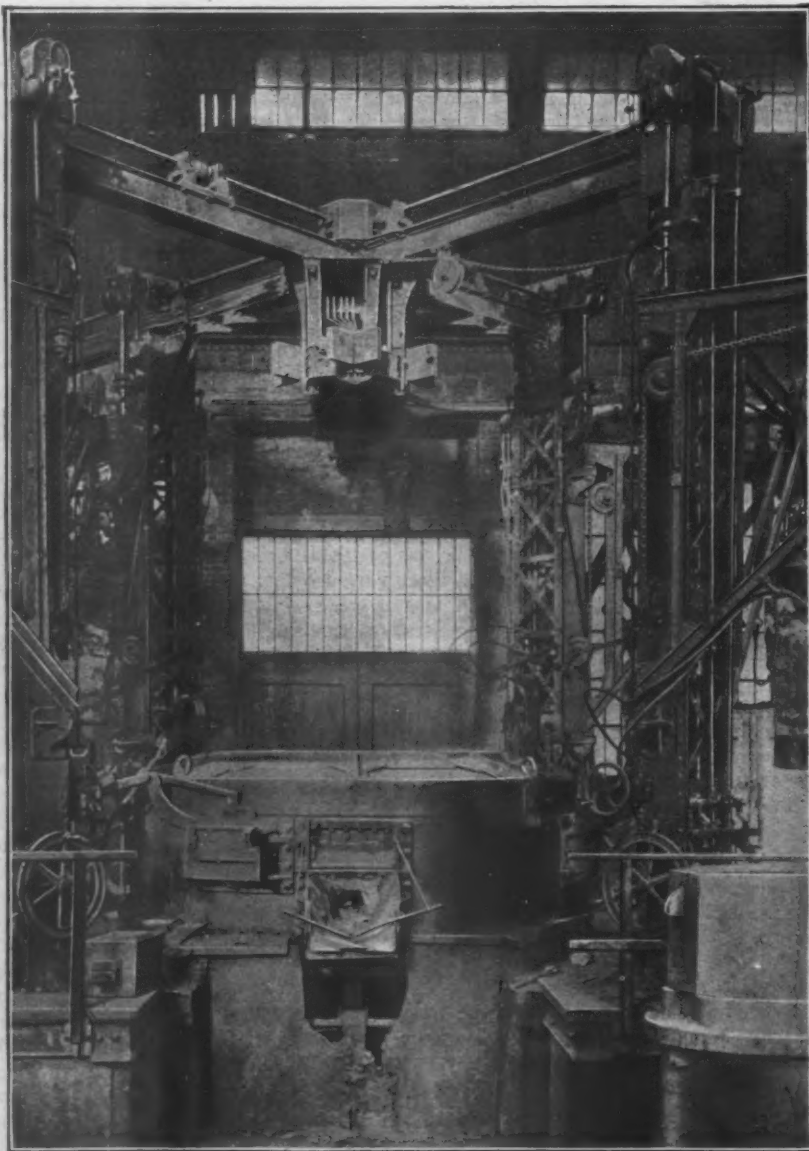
The Keller Electric Furnace at Unieux.—End View.
